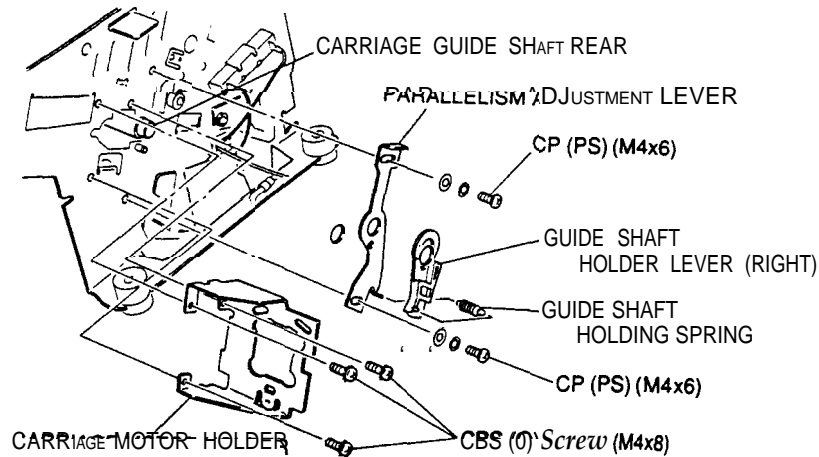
Carriage Guide Shaft Parallelism Adjustment
